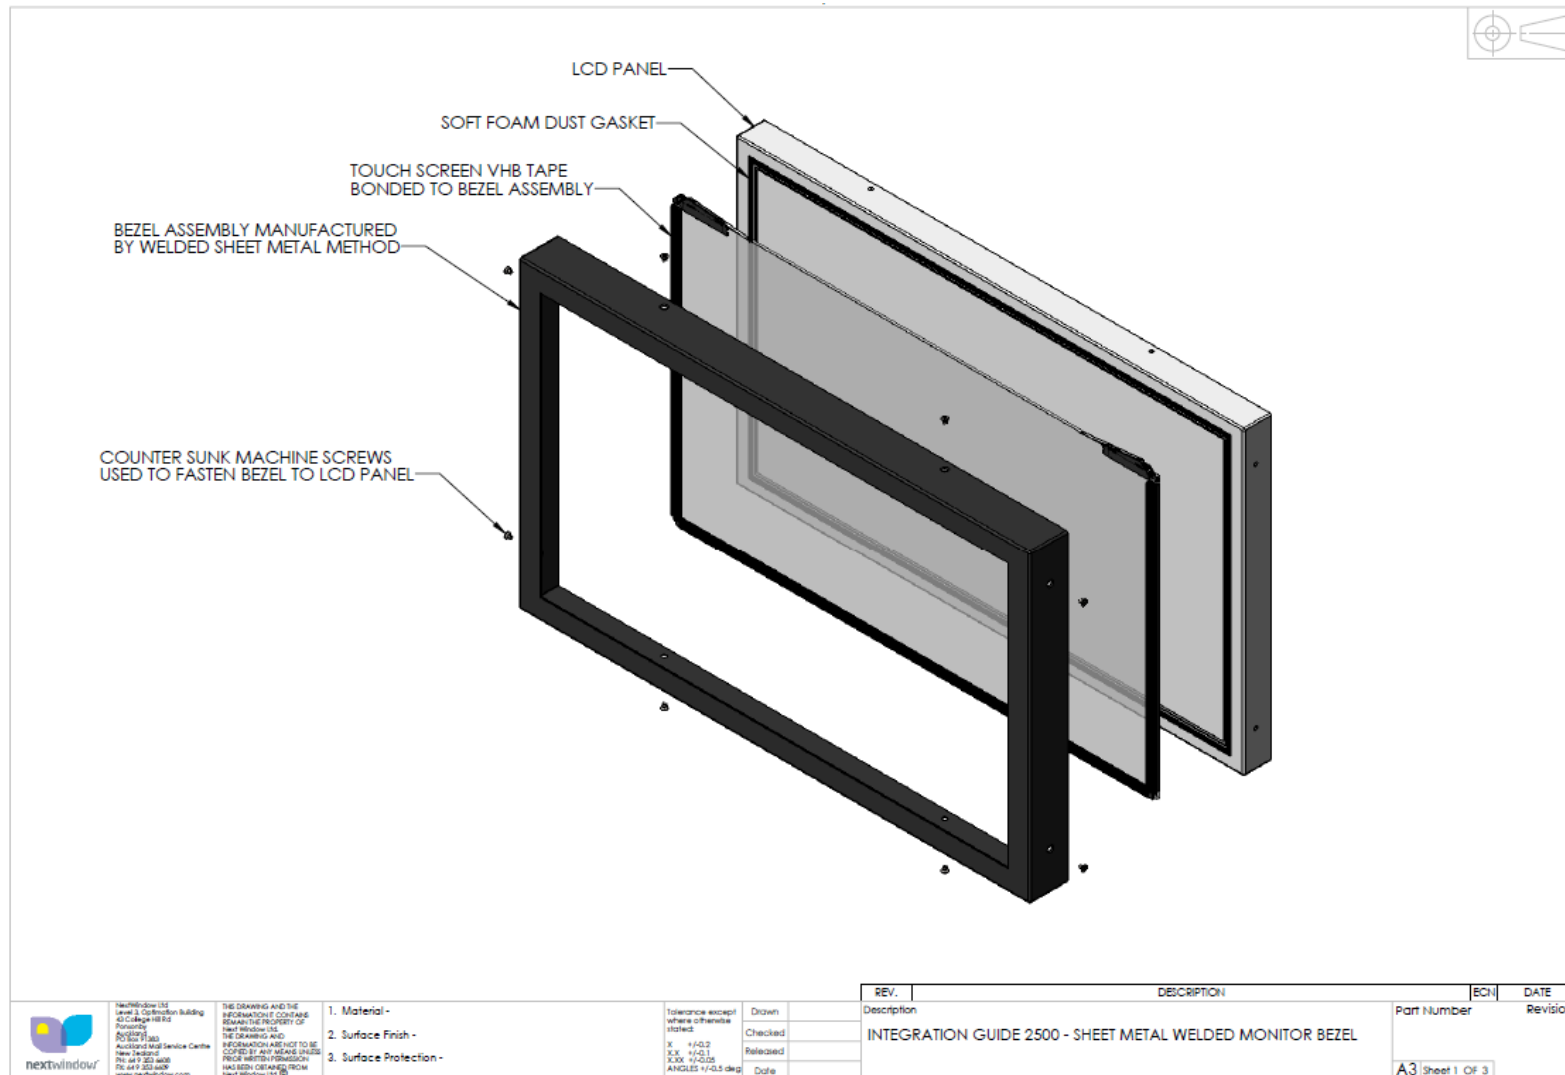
Exploded view of sheet metal welded monitor bezel
